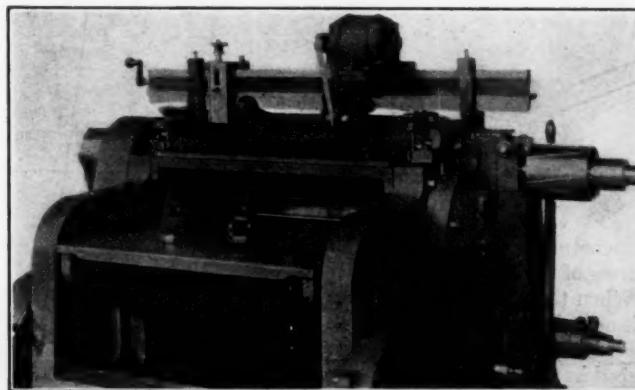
PORTABLE-MOTOR-DRIVEN KNIFE GRINDER FOR GRINDING HIGH-SPEED-STEEL KNIVES IN HEAD
